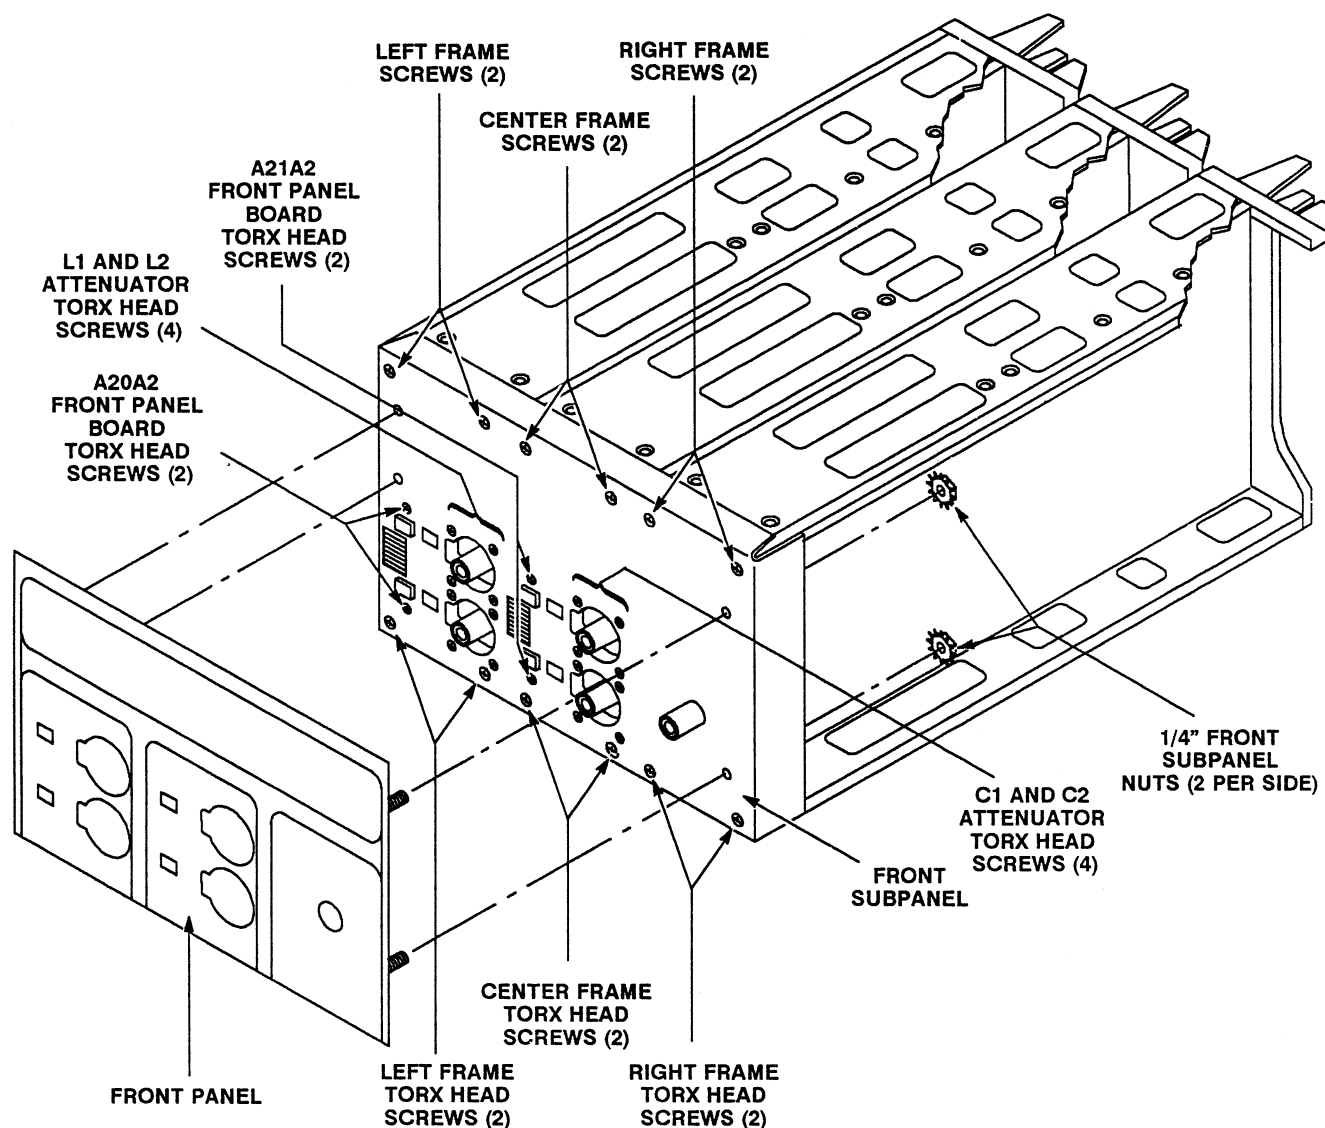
Signal Input Module Front Panel and Front Subpanel Screw Locations
